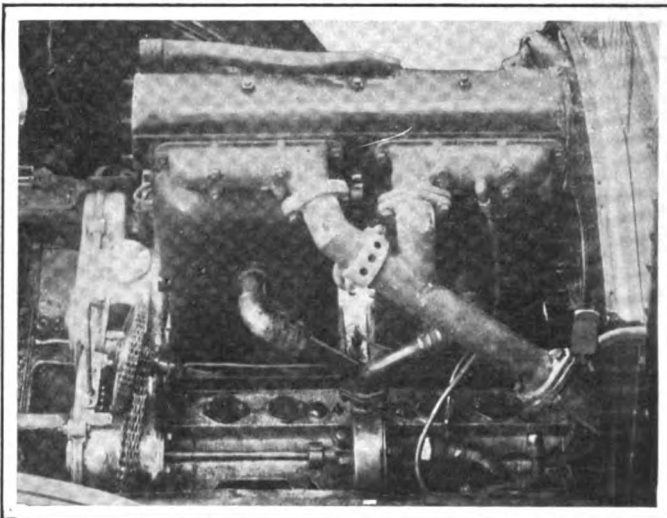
Exhaust side of engine, showing mounting of valve housing
